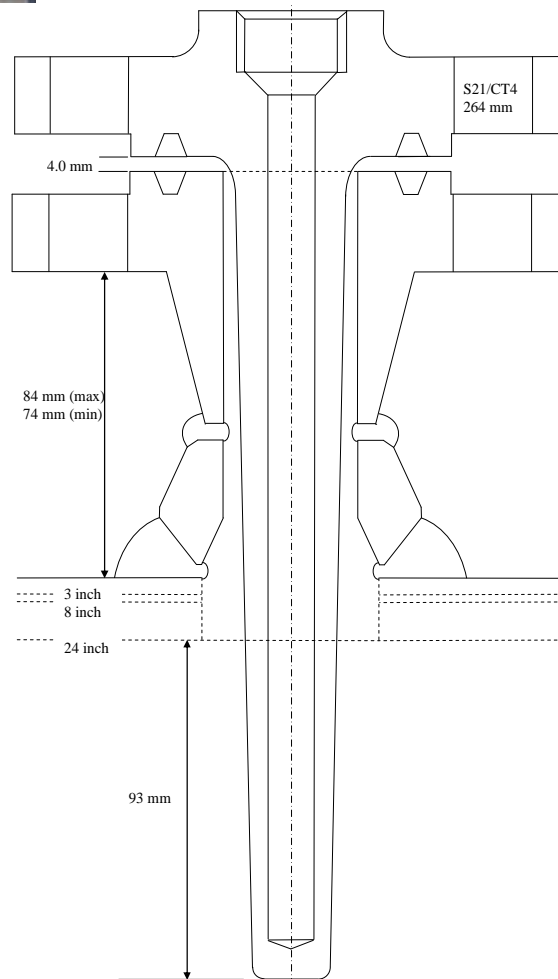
Typical CT4 thermowell installation with a weldolet pressure fitting
